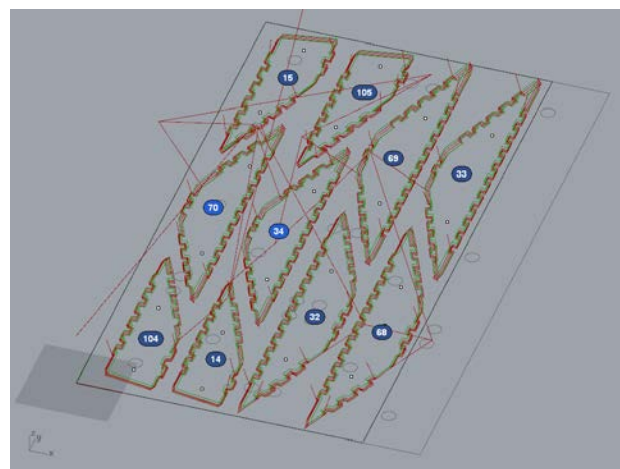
Display of tool paths and tool orientation for 3D cutting of 1DOF MTSJ in the CAD software [5]
